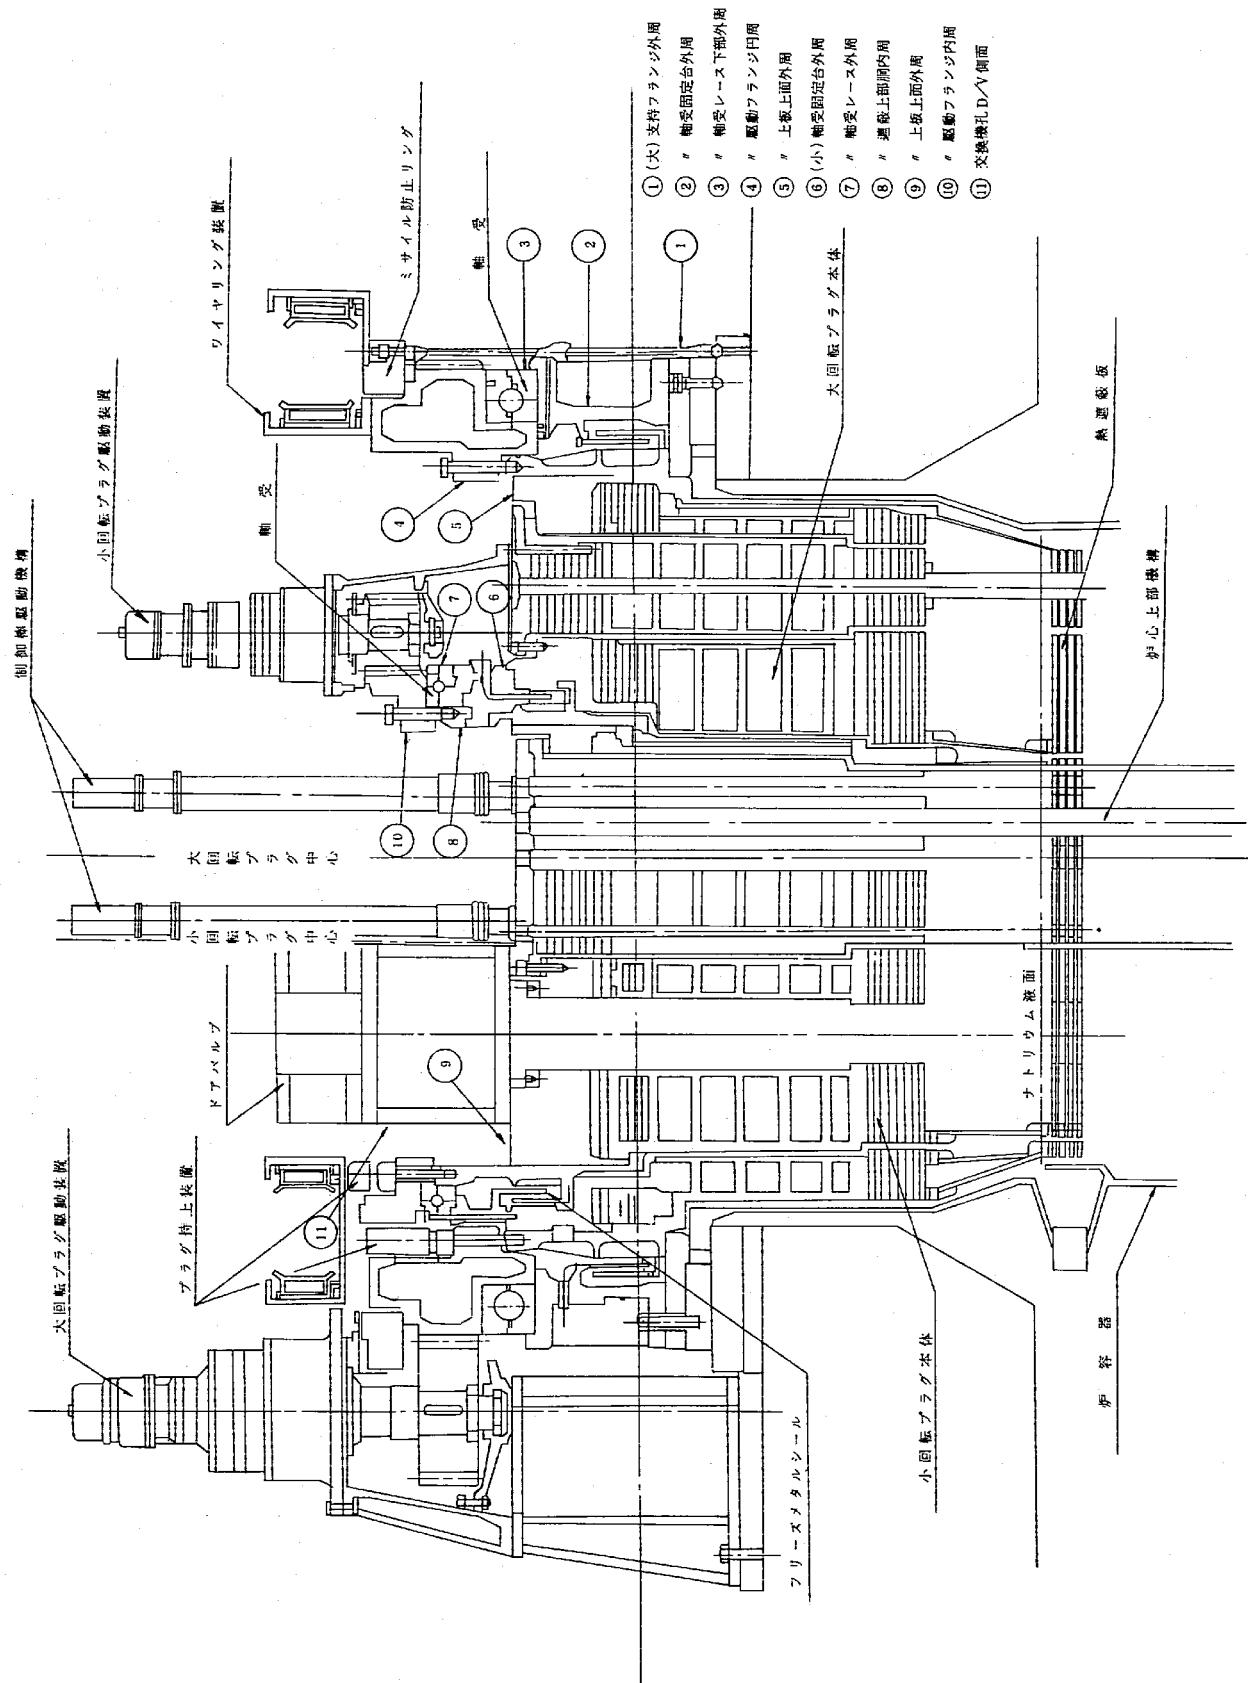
Thermometer Locations on Outside of Rotating Plug
